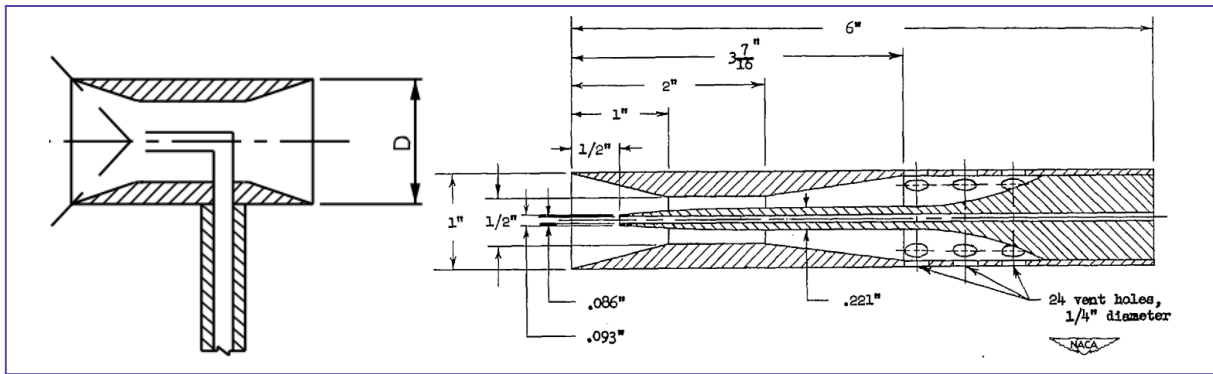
Open style Kiel probe (left) and closed style probe (right) [10], [11]
